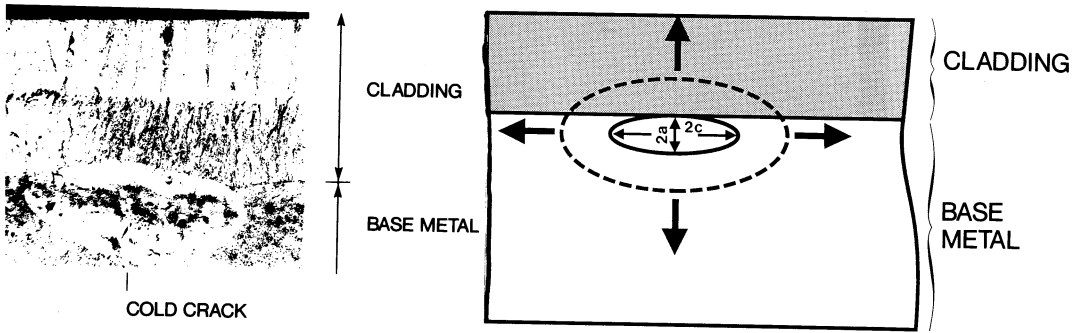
Initial and final shapes of an embedded cold crack after fatigue testing
